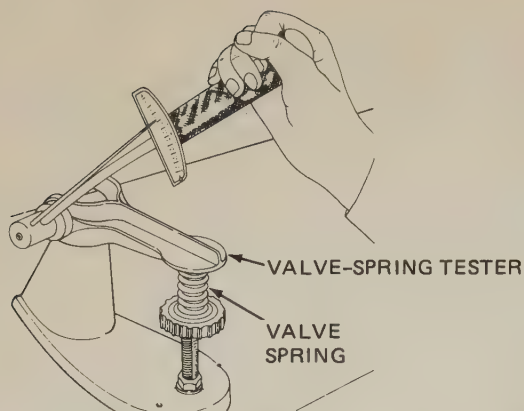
Checking valve-spring tension. (Outboard Marine Corporation)
